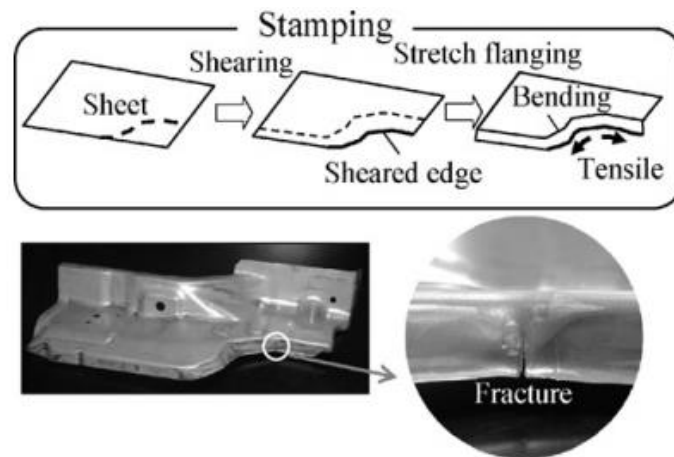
Stamping procedure of 780 MPa high strength DP steel sheet and the fracture in stretch flanging. [40]
